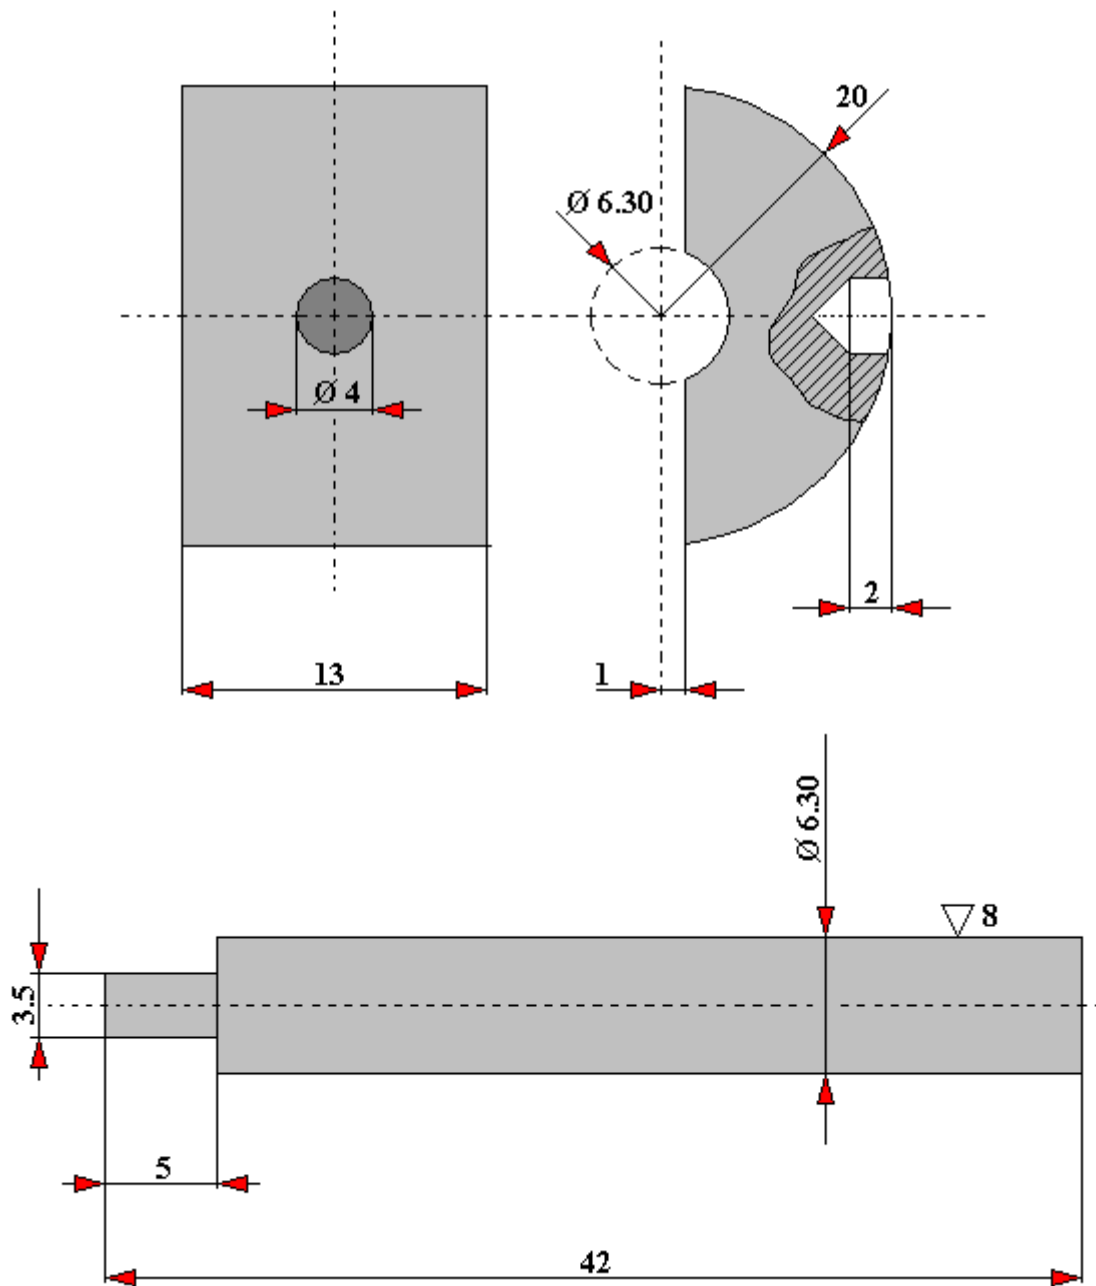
The bearing (friction contact) of Almen-Wieland test rig with given factory dimensions
